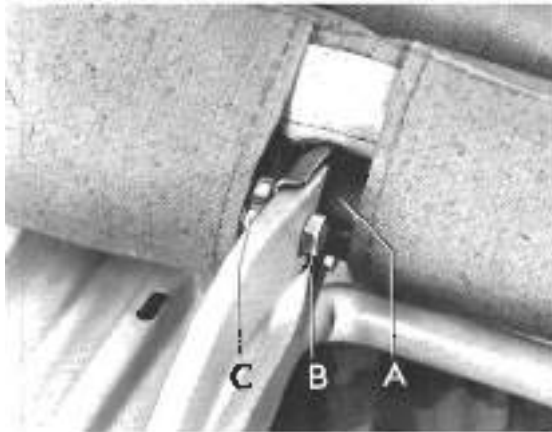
Connecting tube mounting on hinge. The connecting tube with bracket is at A, the bolt at B and the self-locking nut at C.
